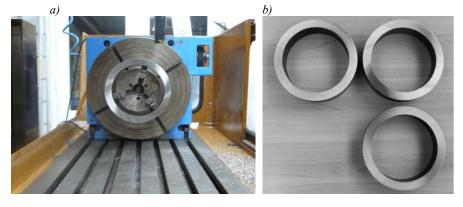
View: a) investigations stand for cutting a face gear, b) example cutting teeth line in the face gear
